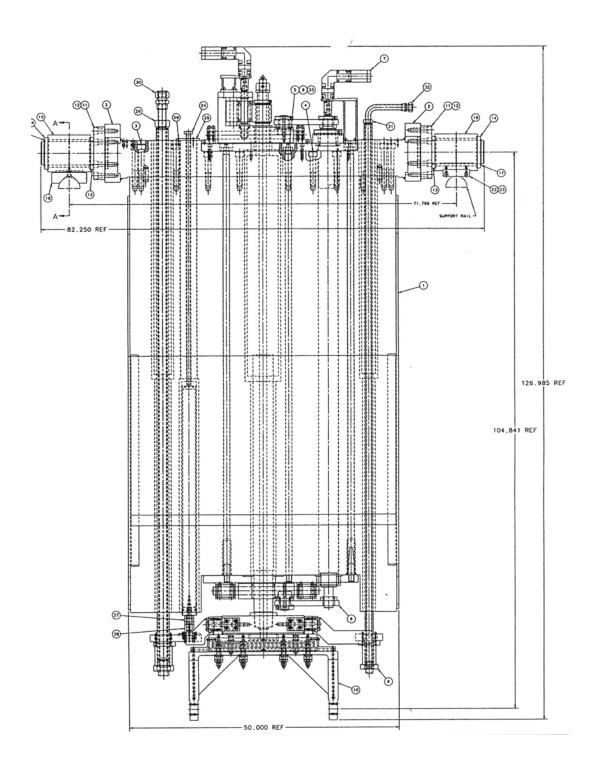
End view of Horn 1 module end-wall showing drive motors, water and electrical feed-through holes and the penetrations for support drawbars and for making water and electrical connections to Horn 1.
